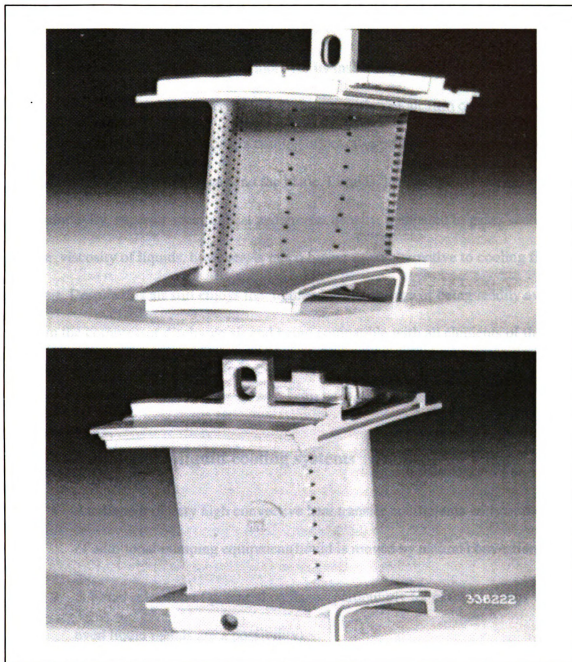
Turbine nozzle vane with impingement and film cooling /3/
